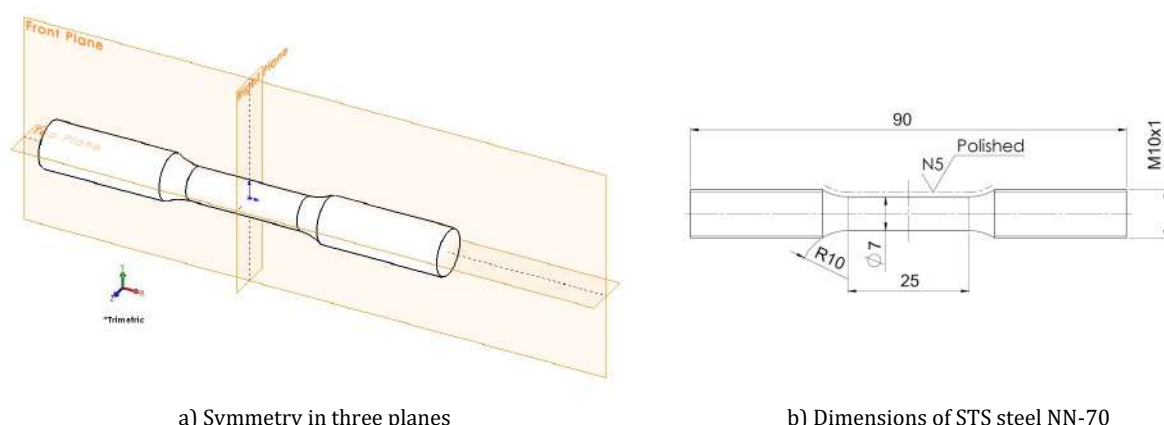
Specimen for LCF test of steel NN-70 [9–33]
